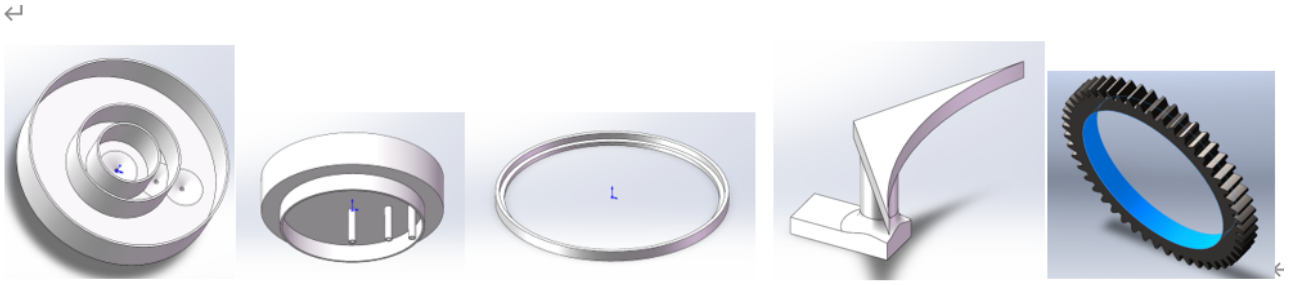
Brewing Nozzle (from top & bottom), Nozzle Holder, Holder Support, Spur Gear Ring
